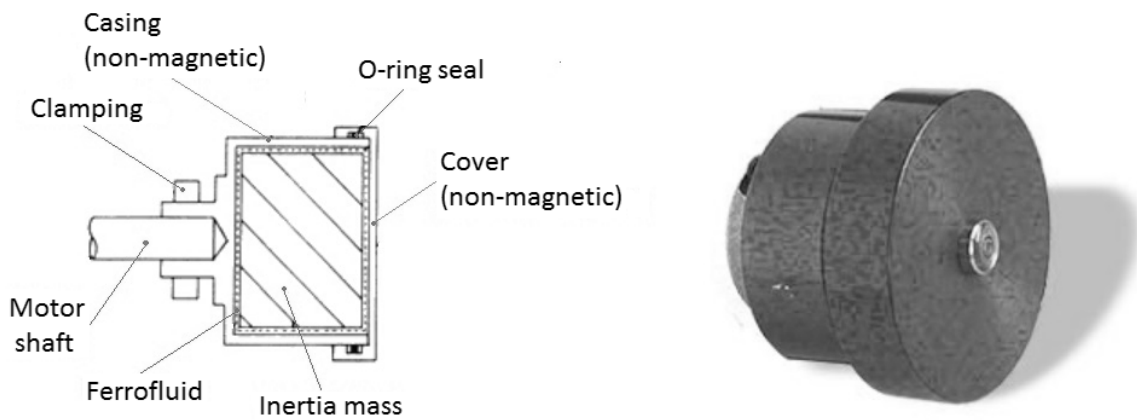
Ferromagnetic fluid based oscillation damper used in step motors [22]
